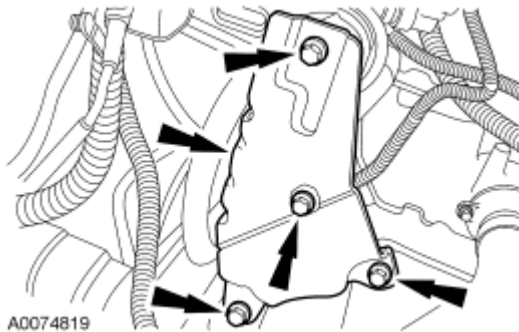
Locating Engine Roll Restrictor Bracket Bolts
